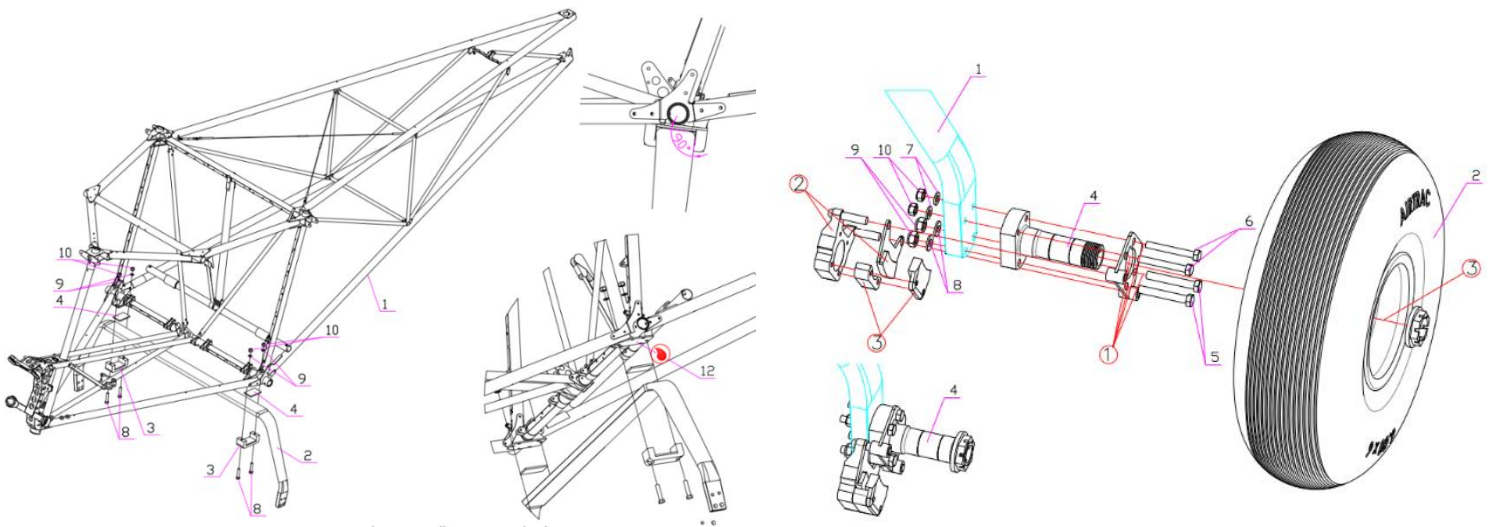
BushCat Landing Gear Assembly to Aircraft [13]
